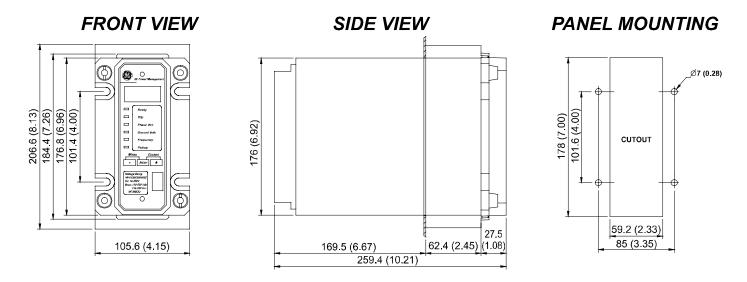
A. MOUNTING AND DIMENSIONS DRAWING FOR MIV MODELS WITH DEPTH REDUCING COLLAR
